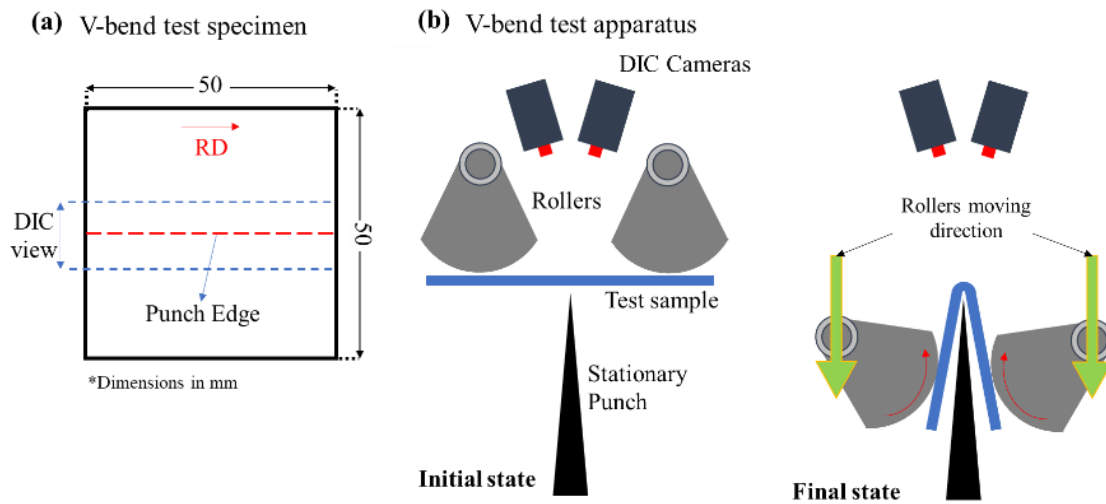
V-bend test specimen and testing apparatus in accordance with VDA 238-100 [148].
